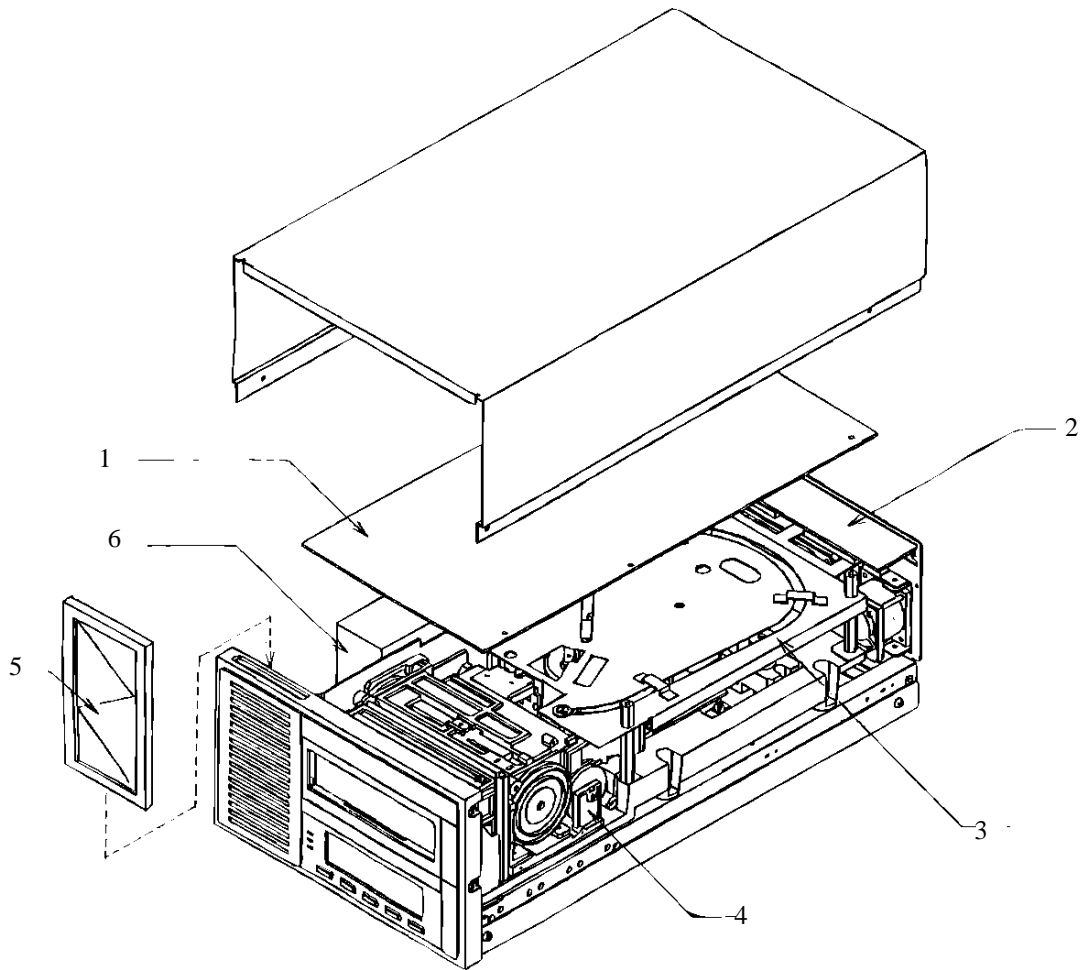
M2488 Tape Drive FRUs (Top Side)
